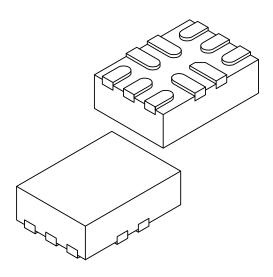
10-PIN, 1.3MM X 1.8MM QFN PACKAGE DIMENSIONS
